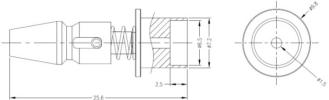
Samsung SM421 nozzle (metal). Dimensions in mm.
